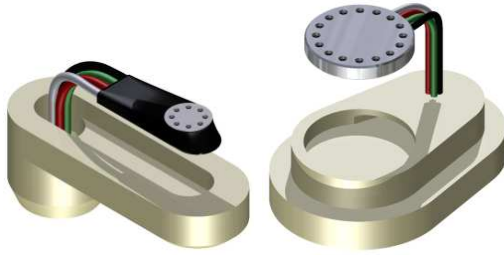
Left: Exploded view of an LQ-062 Series Kulite pressure sensor and its protective packaging; Right: Exploded view of an LL-250 Series Kulite pressure sensor and its protective packaging.
